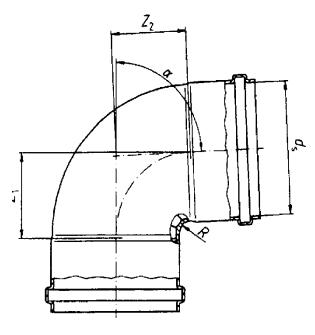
BEND WITH ALL SOCKETS (UNSWEPT)
